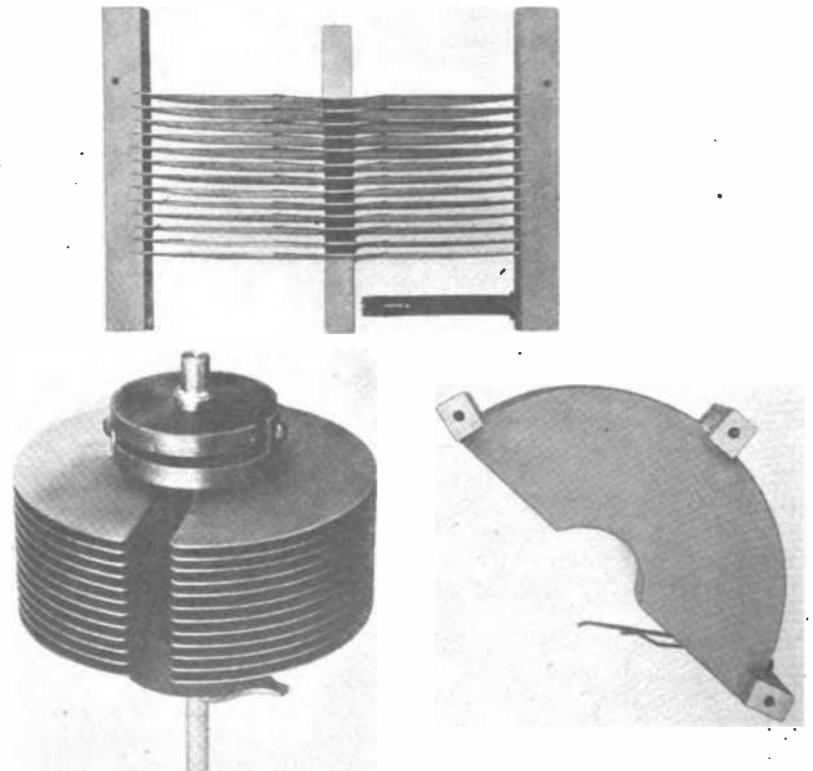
Views of the fixed plates and the rotating plates, bottom up, illustrating the commutator
